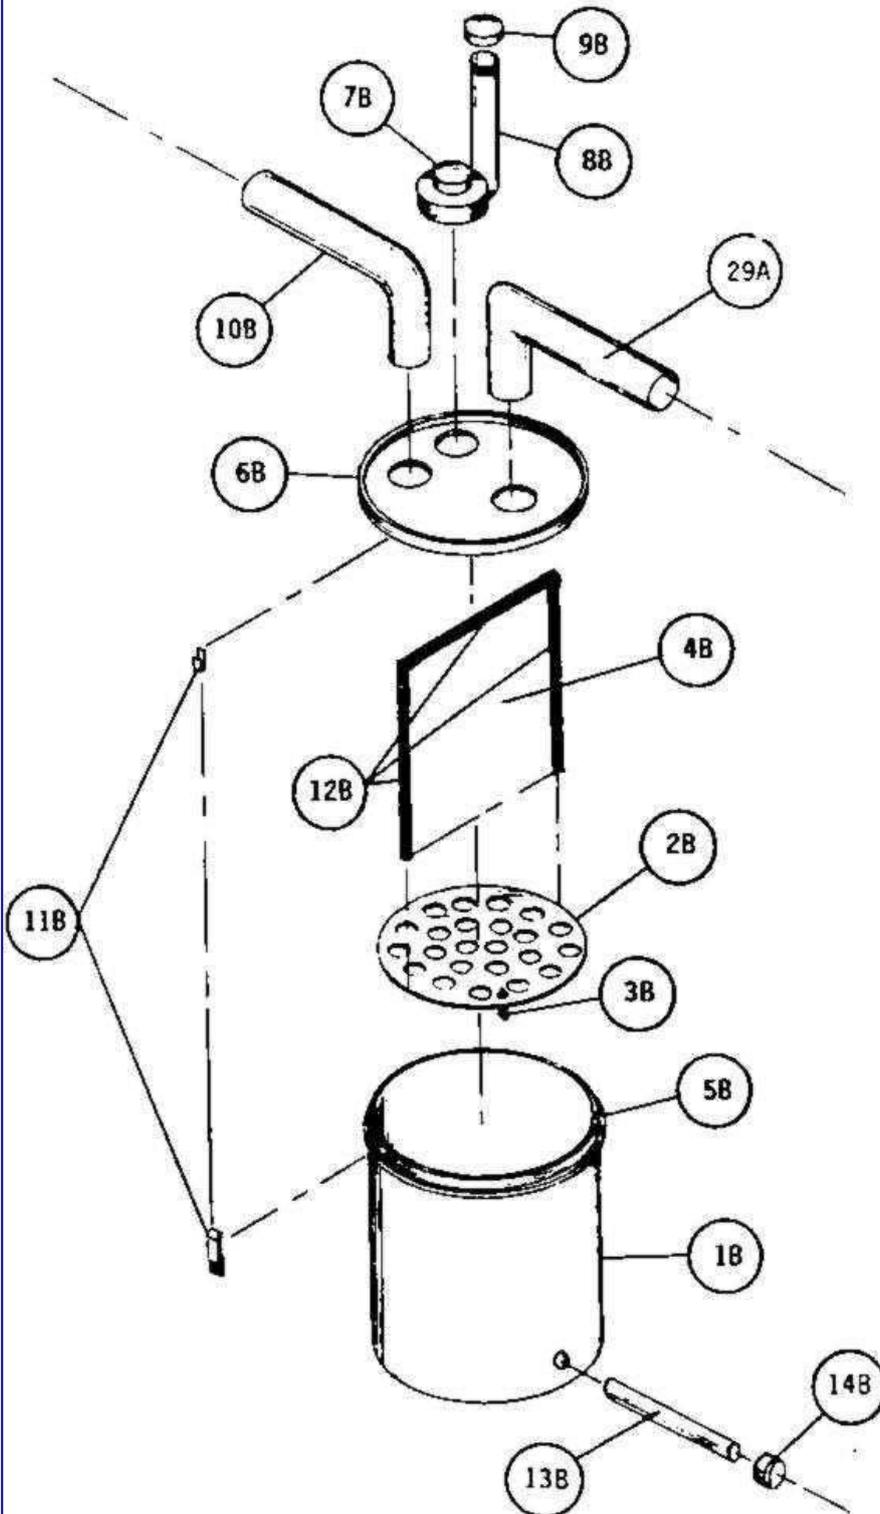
Exploded, schematic diagram of the filter unit.
